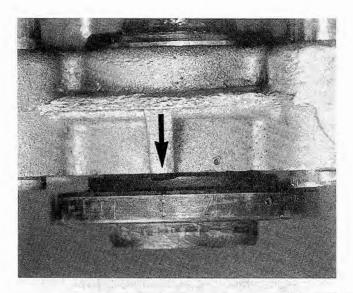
Camshaft flange mark aligned with cast mark on cylinder head (arrow).
